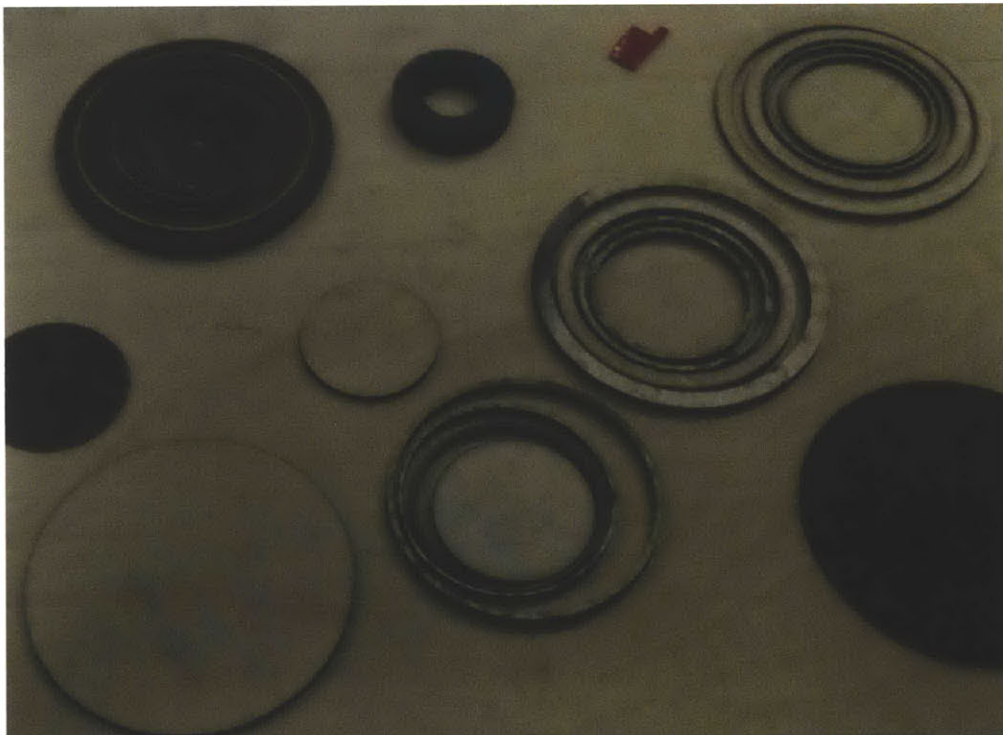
Assembly of the cut copper rings with wooden spacers to electrically insulate and mechanically separate the four conductive rings. The spacers were cut from 1/8" thick plywood on a laser cutter.
